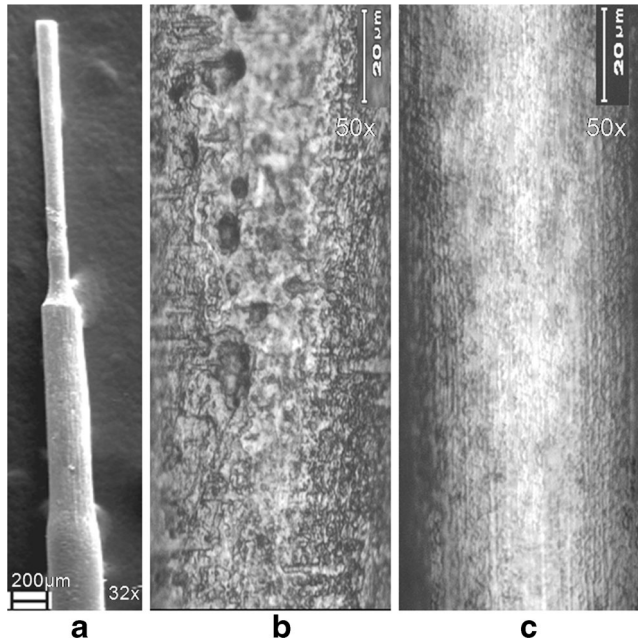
a SEM image of the straight cylindrical microtool. b Surface micrograph before machining. c Surface micrograph of the finished microtool
